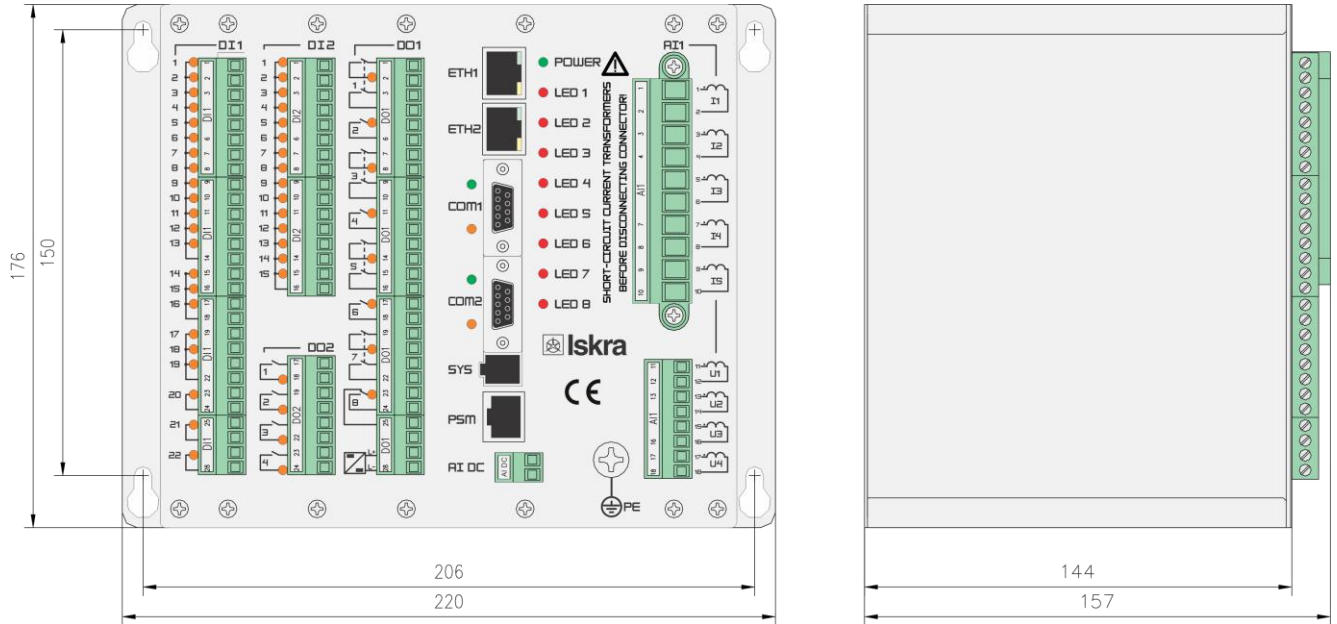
FPC 680 / CAU 380 - N1(4) device mounting dimensions
